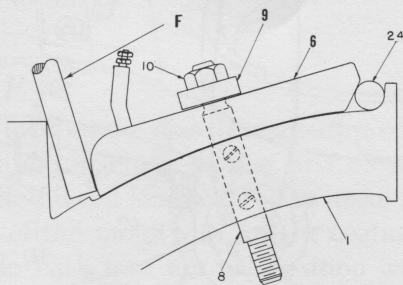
View Showing How to Apply New Mouthpiece Sensing Bulb
